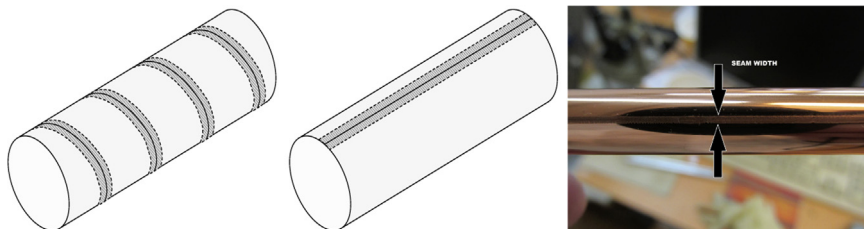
Different adhesion styles of straw construction; (Left) the original doubly-wound style, (Centre) the new straight-adhesion style, (Right) the welding seam of a completed straw.
